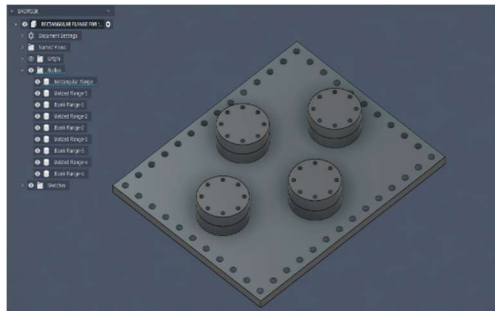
13 mm Rectangular Vacuum Vessel Flange with CF-63 Flanges
